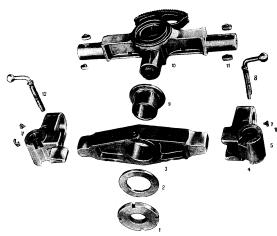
AXLE WITH EQUALIZER — DISMANTLED
